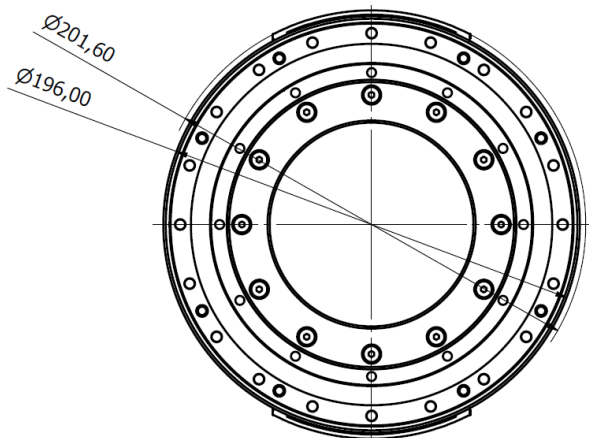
CAD mechanical drawing presenting the camera dimensions, front view.
